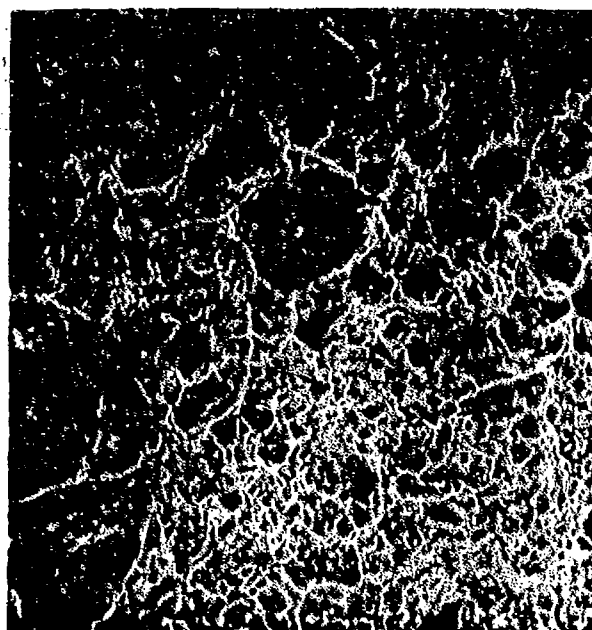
Tensile overload region in temper-embrittled AX-110 weld fatigue specimen, 750x.
